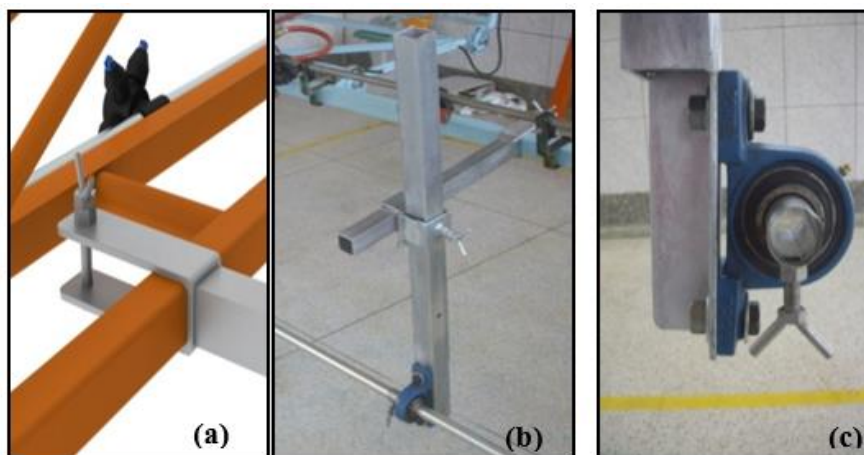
Detailed view of the horizontal bar attached to the spray boom (a), vertical holder with the iron pipe (b), and the bearing housing with a steel pipe welded to the inside of the bearing and hexagonal nut welded to the outside of the steel pipe with bolt (c).
